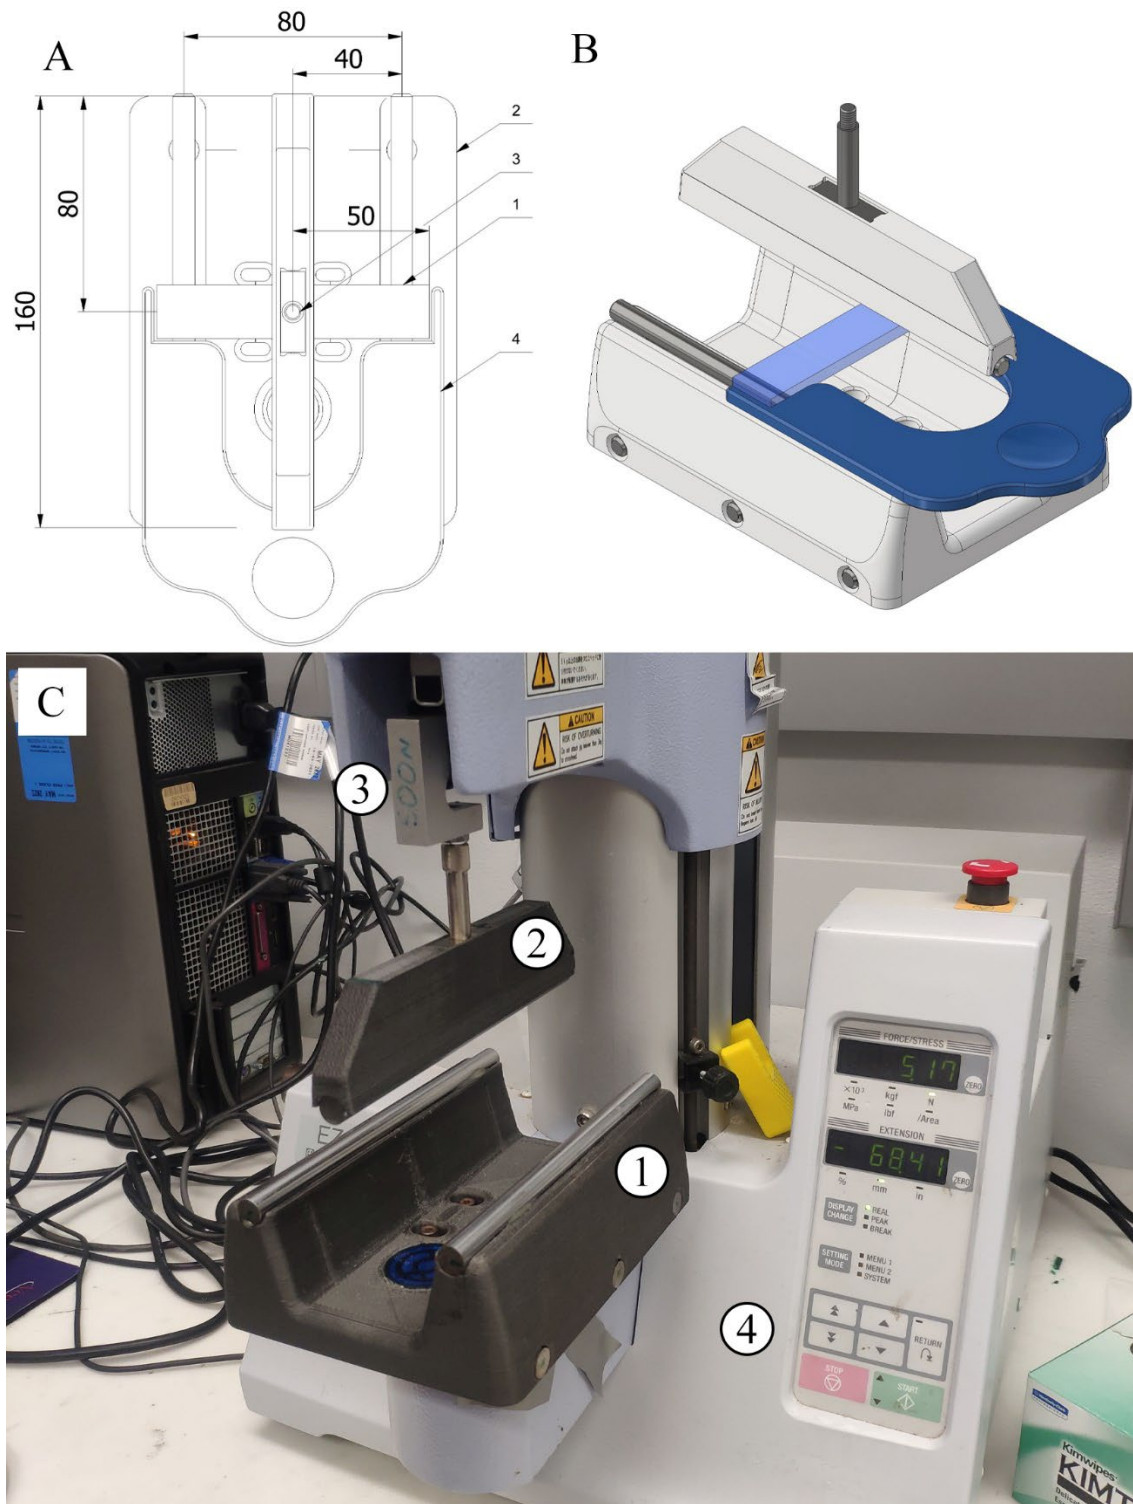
A) CAD model of Shimadzu adapter probe position relative to sample. B) picture of the Shimadzu EZ-S mechanical analyser with 3D printed adapter. Numbers 1-4 in A depicts sample, adapter base, press tool, and sample positioner, respectively. Numbers 160, 80, 80, 40, 50 in A indicate length (mm), midpoint length (mm), span (mm), distance between supporting pin and loading pin (mm), sample midpoint (mm), respectively. Number 1-4 in C indicate adapter base, press tool, 500 N load cell, and Shimadzu mechanical analyser, respectively.
